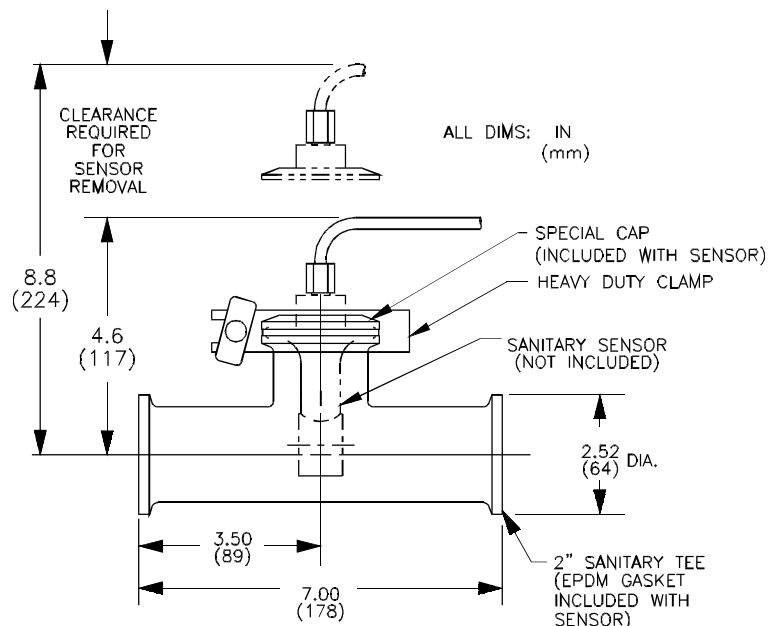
Sanitary (CIP) Flange Mounting Details
